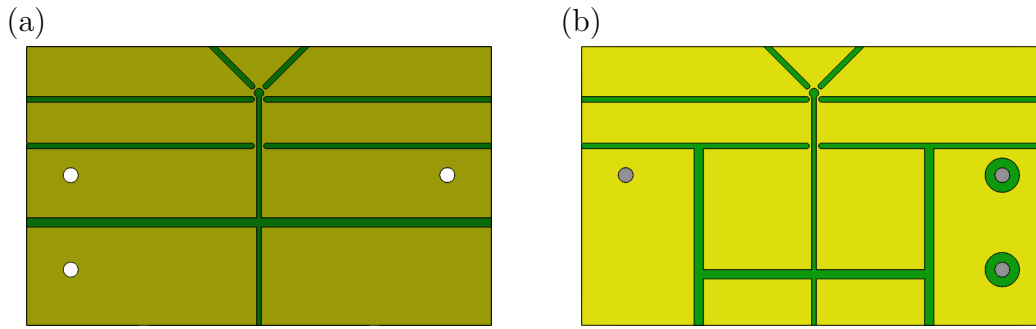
An example of the SOLIDWORKS computer aided design microcoil drawings. Panel (a) shows the microcoil side of the board and panel (b) shows the induction coil side. This design contains two vias which are bridged by a single $1\ \Omega$ resistor of the type shown in figure 6.6(a). The opposite half of the design contains another via to allow the circuit to be completed by connecting the two sides of the board. Figure 6.5 shows this version of the microcoil in its completed form.
